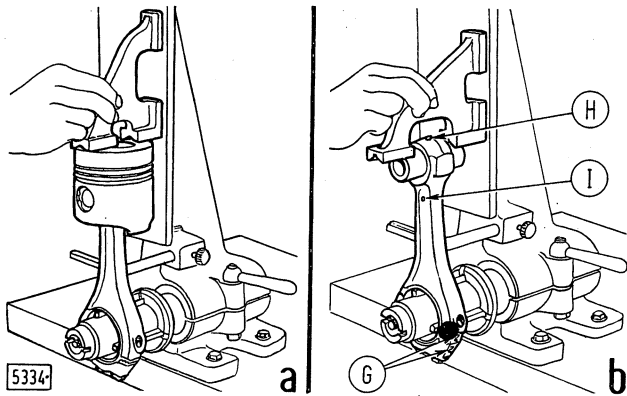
Checking squareness of piston-connecting rod assembly (a) and parallelism of a connecting rod axis (b).
